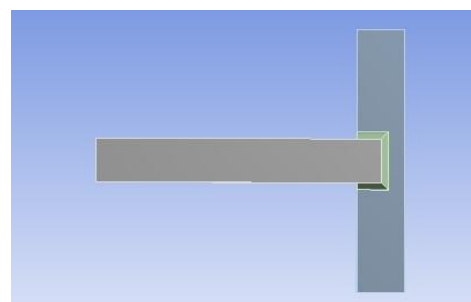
Symmetrical eccentric loaded welded joint
